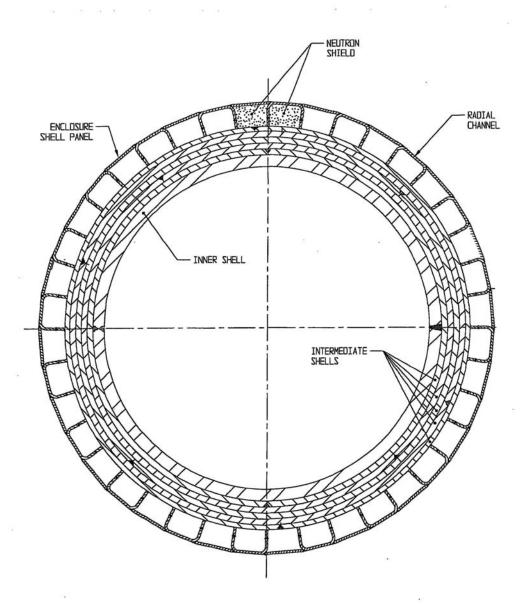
; OVERPACK MID-PLANE CROSS SECTION
